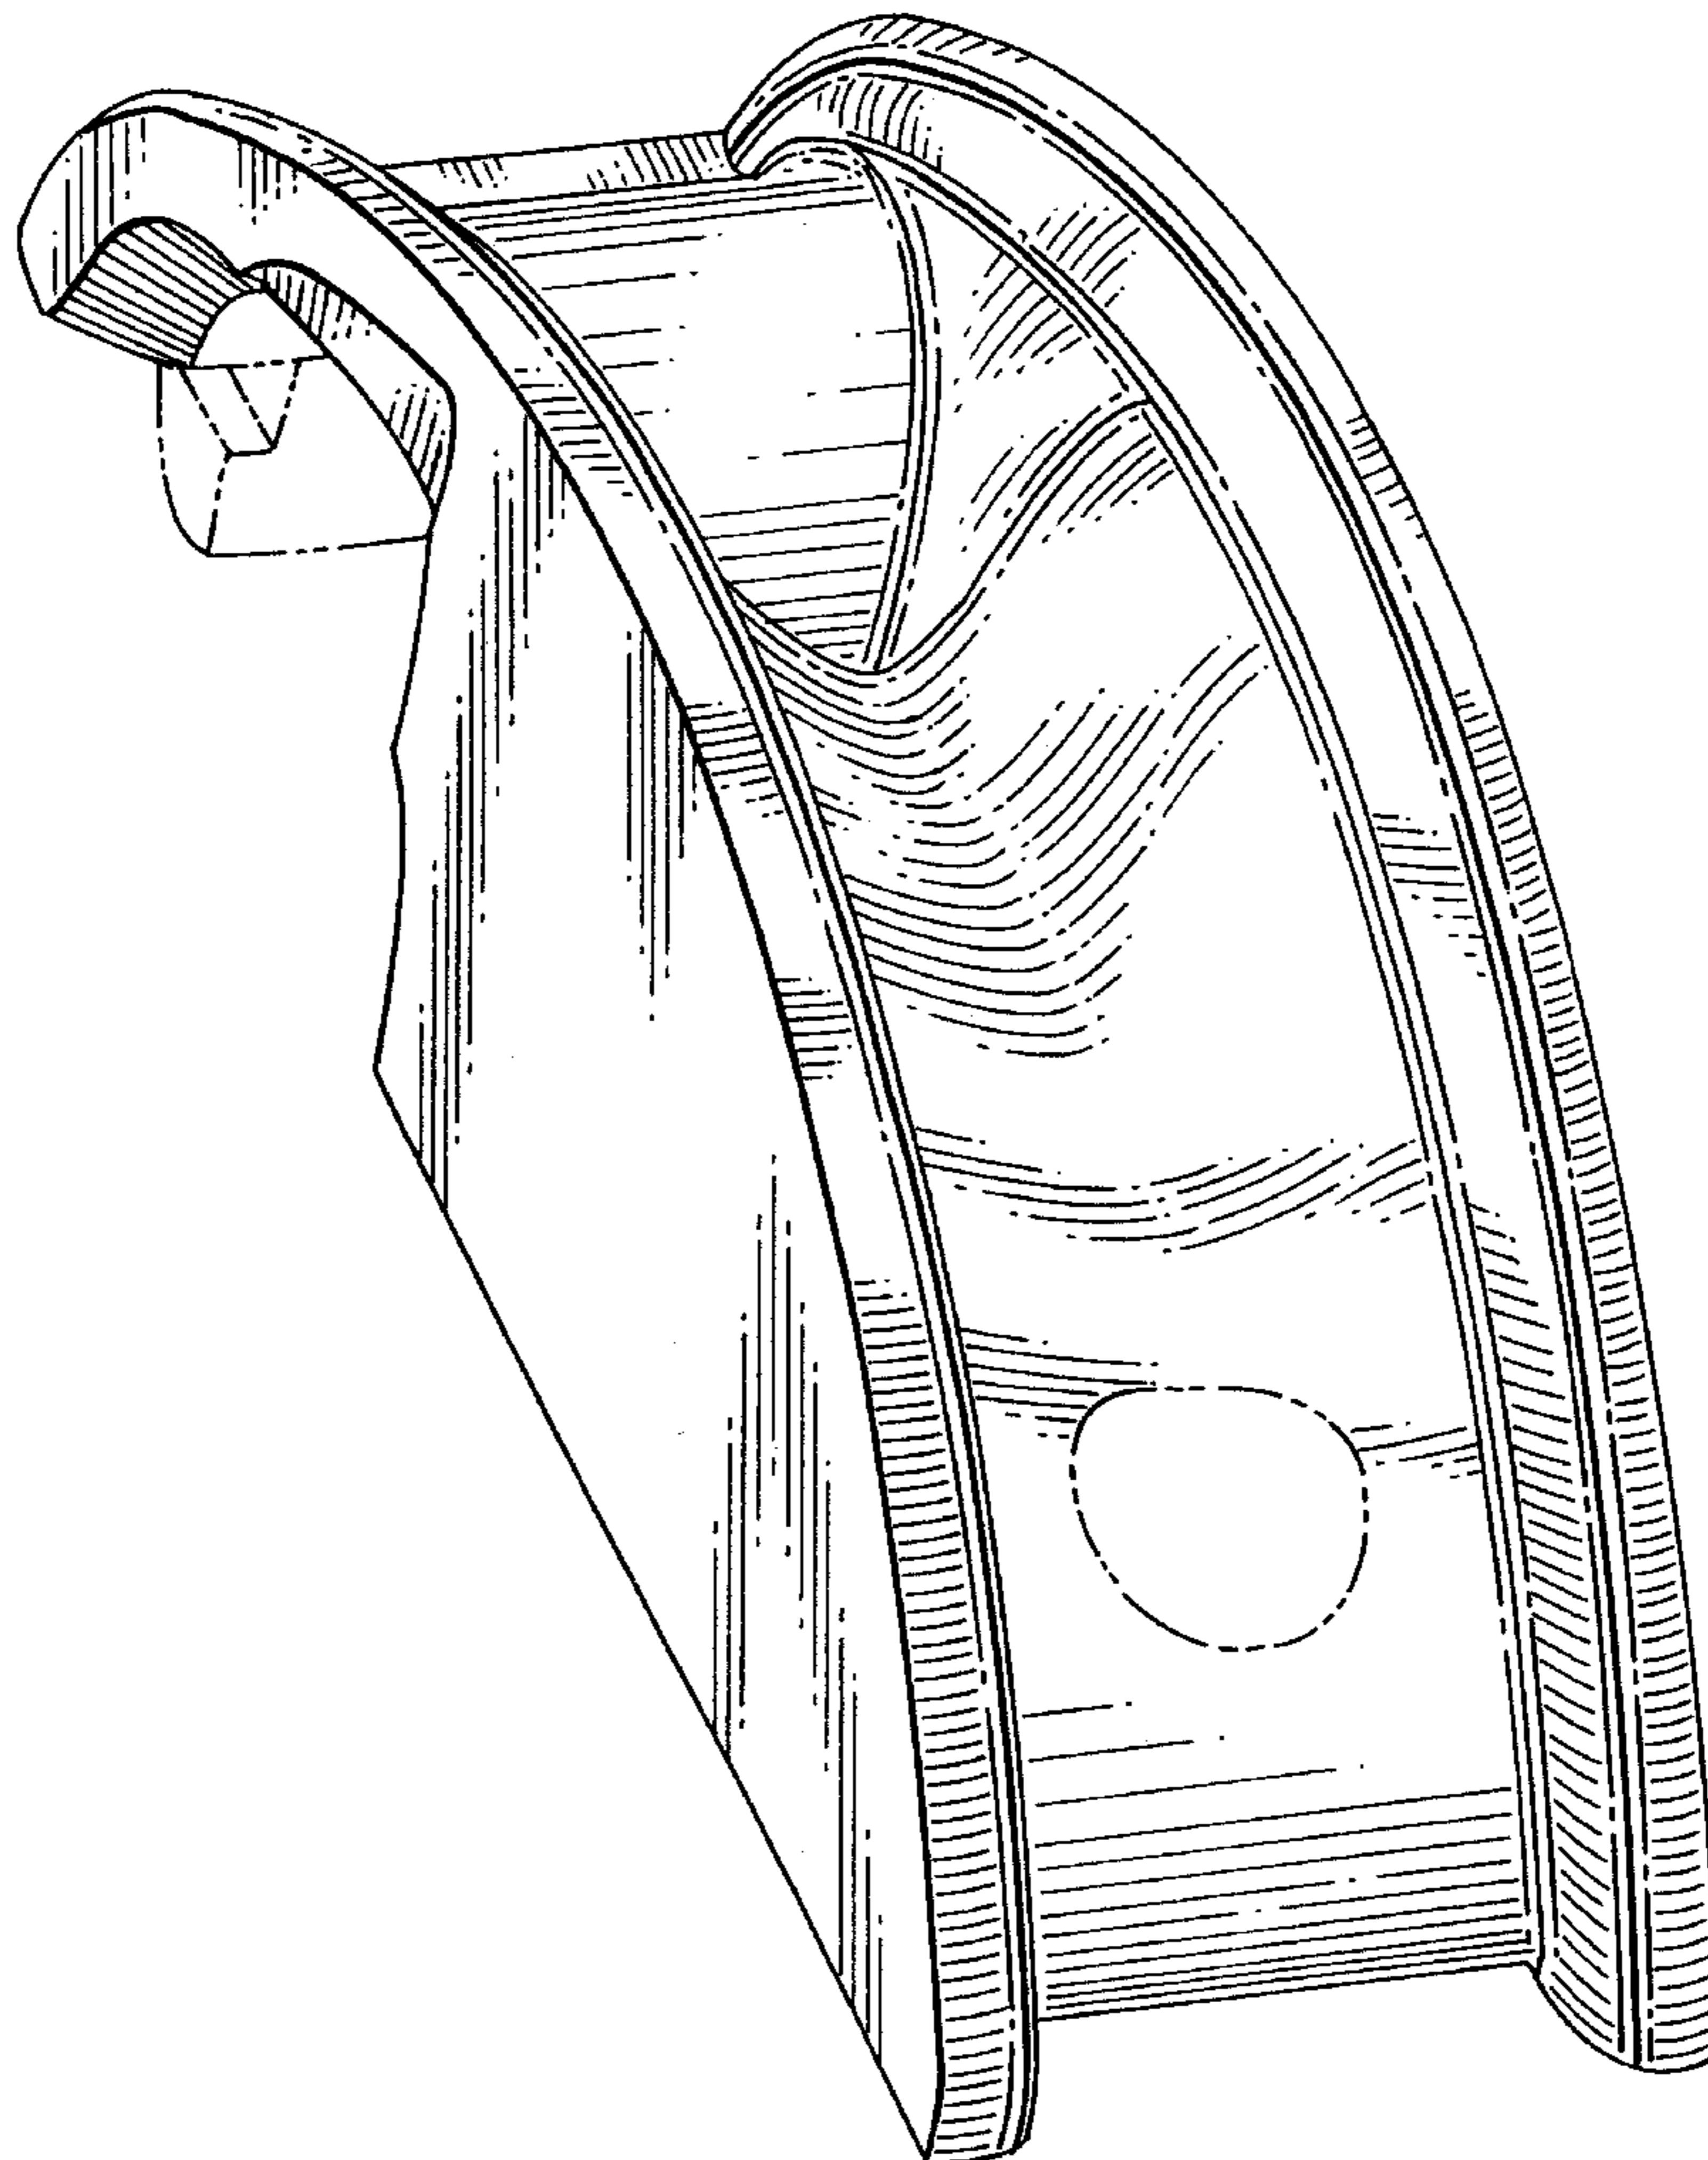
is a left side view of the crop conveyor tine stripper half shown in FIG. 2.
